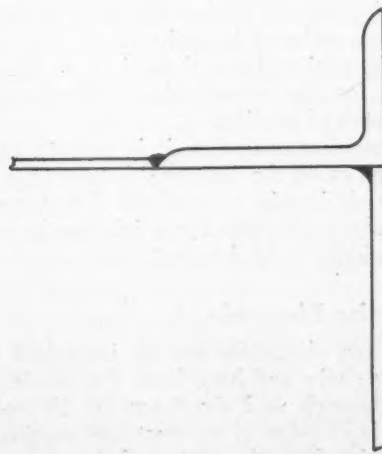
The improvement to the design in Fig. 1 eliminates the floor flange and simplifies the welding
